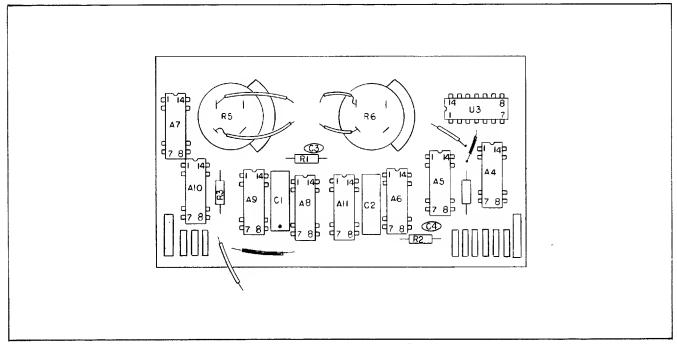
A12 Remote Control Unit #2 PCB Assembly
